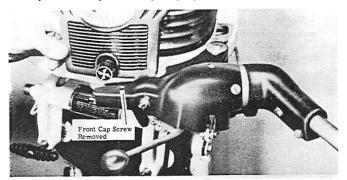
Removing Front Cowl Cover (A-25262A1) Handle)
